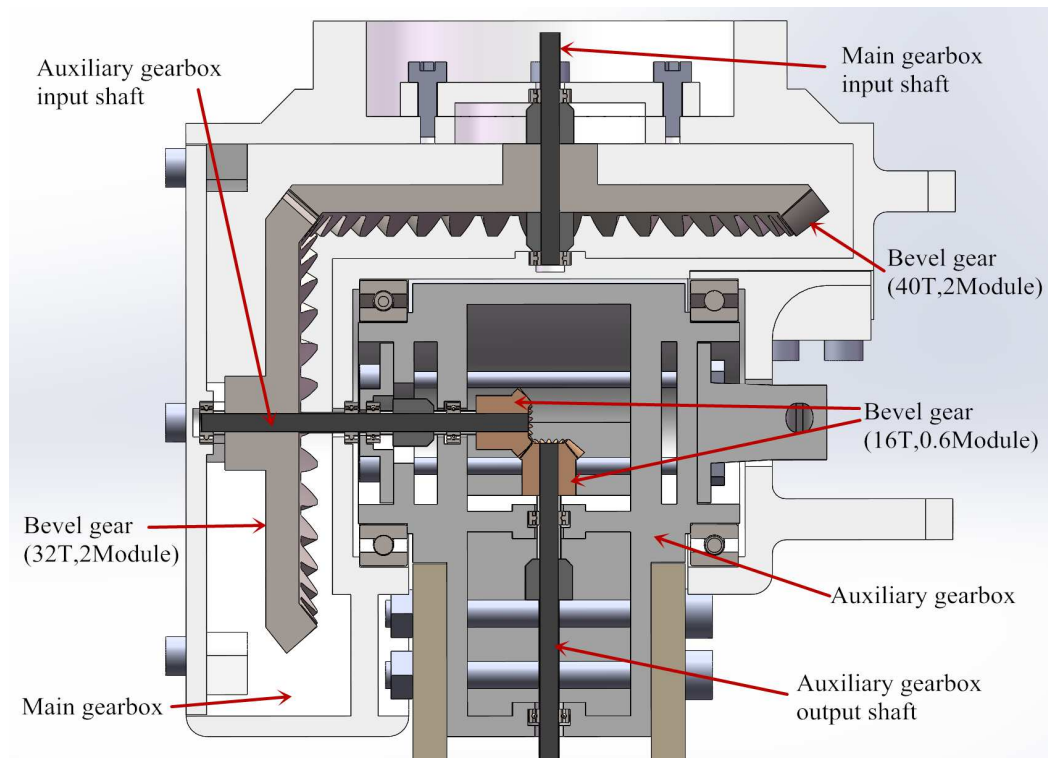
Cross section of the complete assembly of main gearbox and auxiliary gearbox
